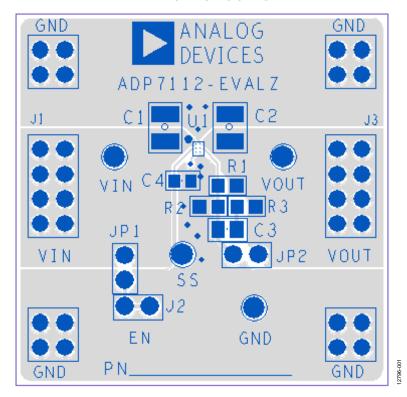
ADP7112CB-EVALZ Printed Circuit Board (PCB) Layout
